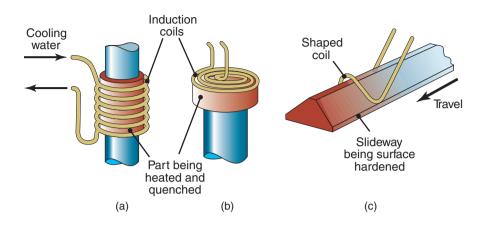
Types of coils used in induction heating of various surfaces of parts.
